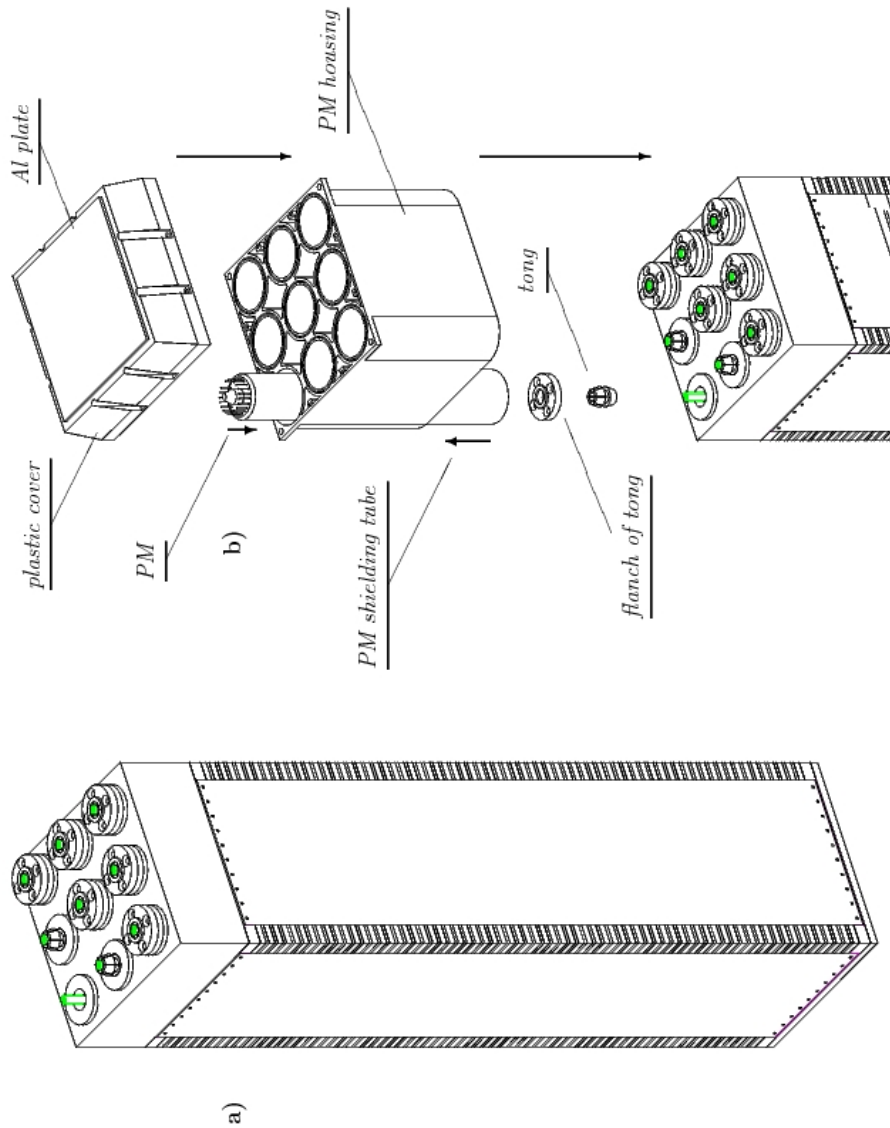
Assembly of the inner section module, second stage. Assembled stack with 6 from 9 formed fiber bundles (a), and the read-out part assembly (b) are shown
